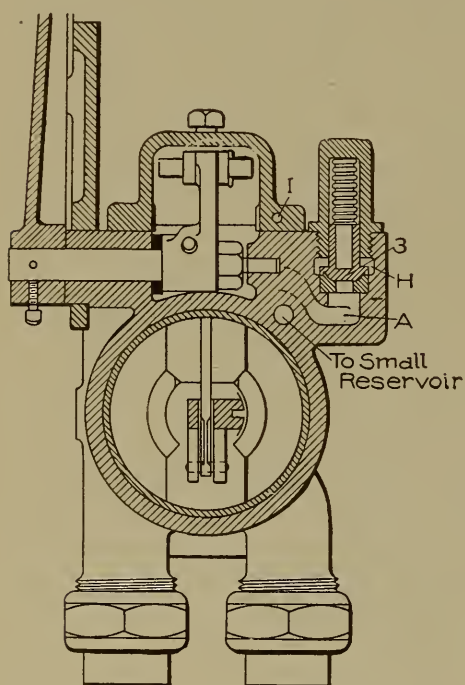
Section through Feed-Valve of New York Engineer's Brake-Valve, as Seen from Rear.
